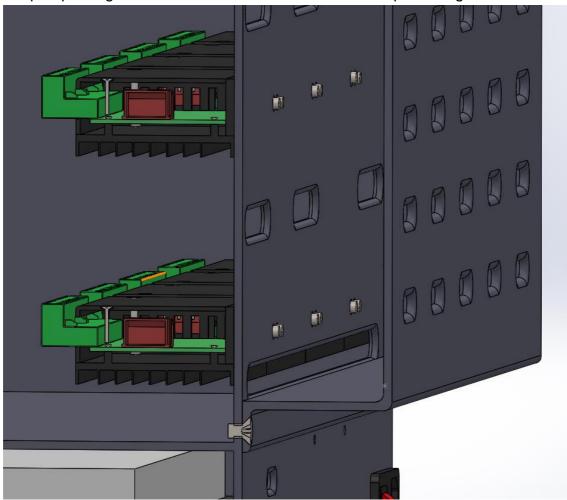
Section view of the machine with back cover for the and highlighting screwed connection to the back housing part.
